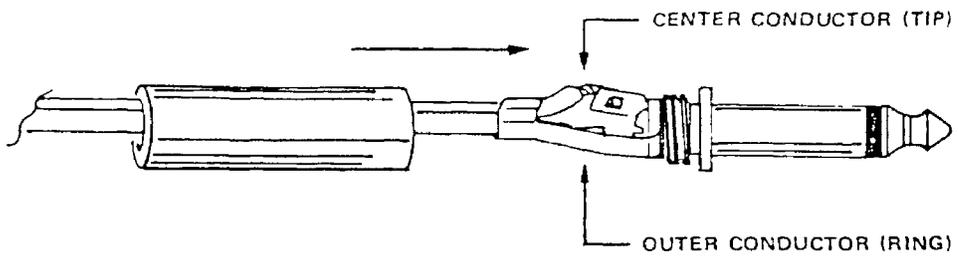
ATTACHING CABLE TO PHONE PLUG CONNECTOR
